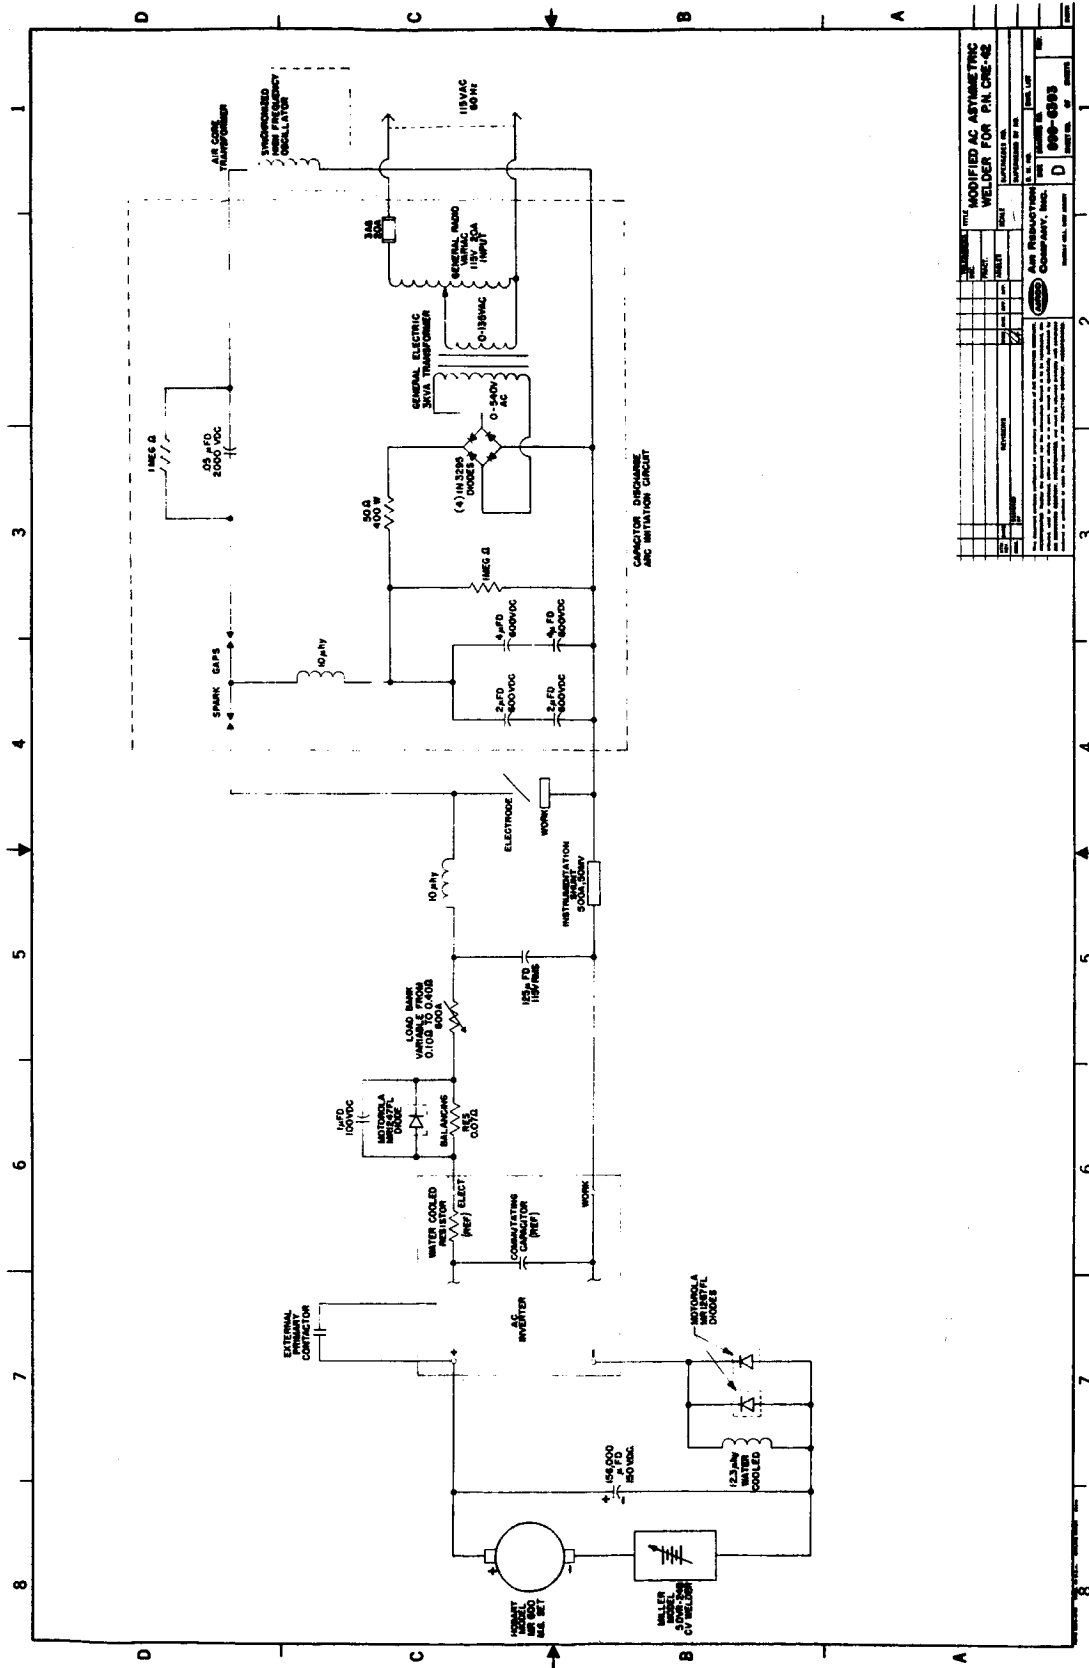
MODIFIED CIRCUIT OF INVERTER for WELDING on SCRAPED PLATE
